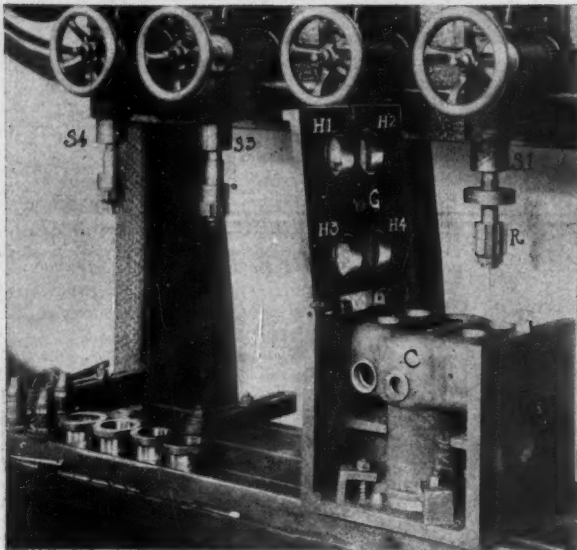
BOX JIG FOR BORING VALVE COVERS
